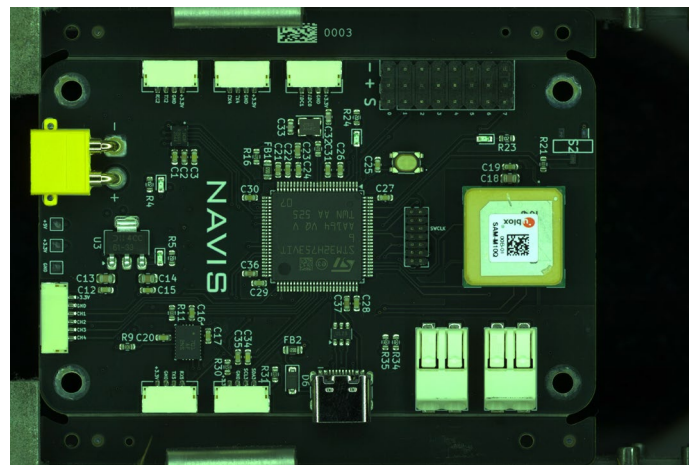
Manufactured prototype of the developed flight controller during production.
